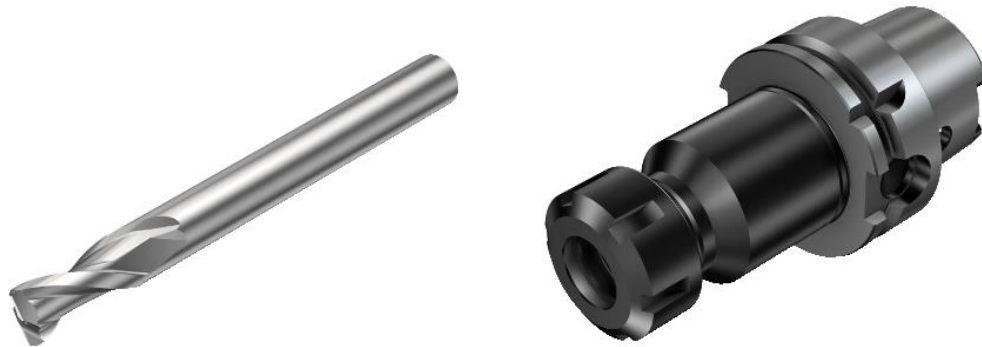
2S221-0400-030-NG H10F carbide milling cutter and 392.41014-63 16 100 tool holder [44], [45].
